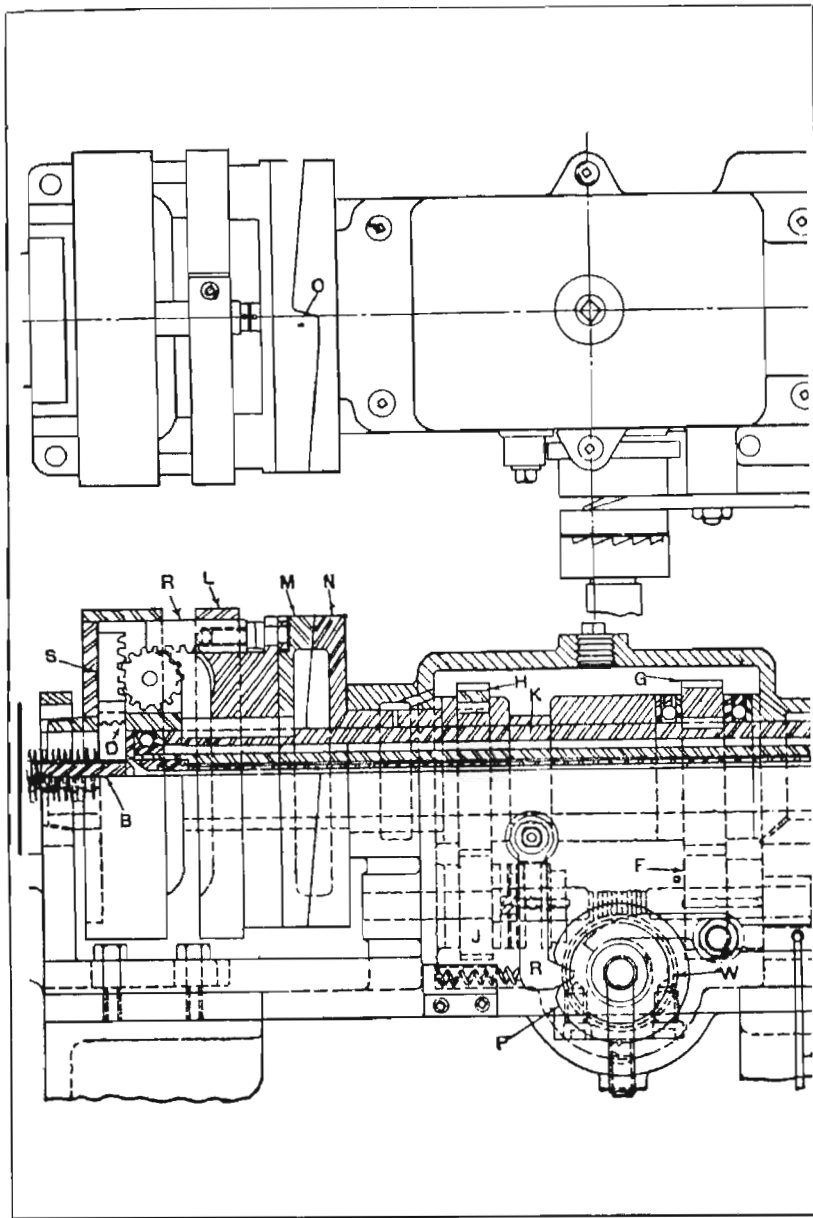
Sectional and Plan View Showing Tool-feeding Mechanism Equipped with Mating Cam Sections which Rotate at Different Rates to Provide the Motion Required
